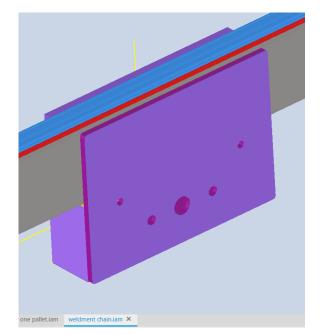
Same plane as before with machining operations in assembly file .iam.
